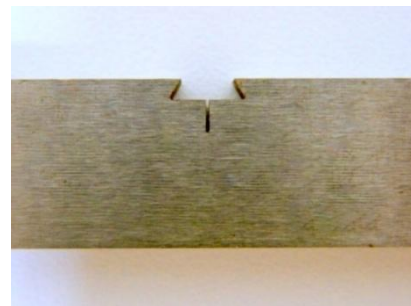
The beam with 2 mm dovetail and 3 mm artificial crack opened with wire erosion
